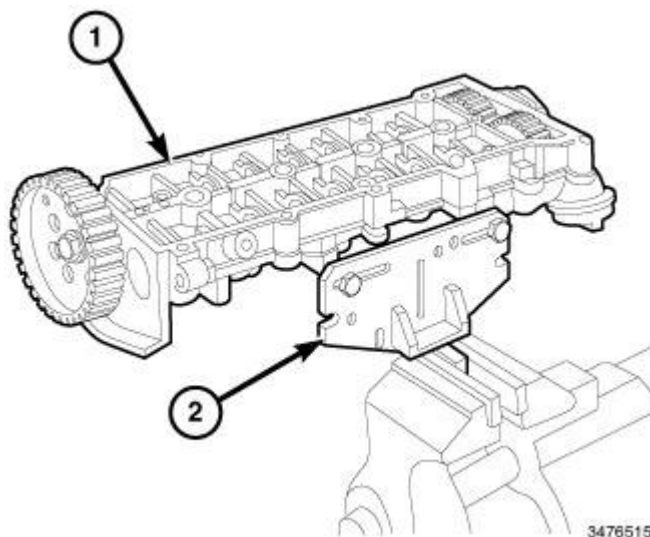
Cylinder Head Cover & Cylinder Head Holding Fixture
